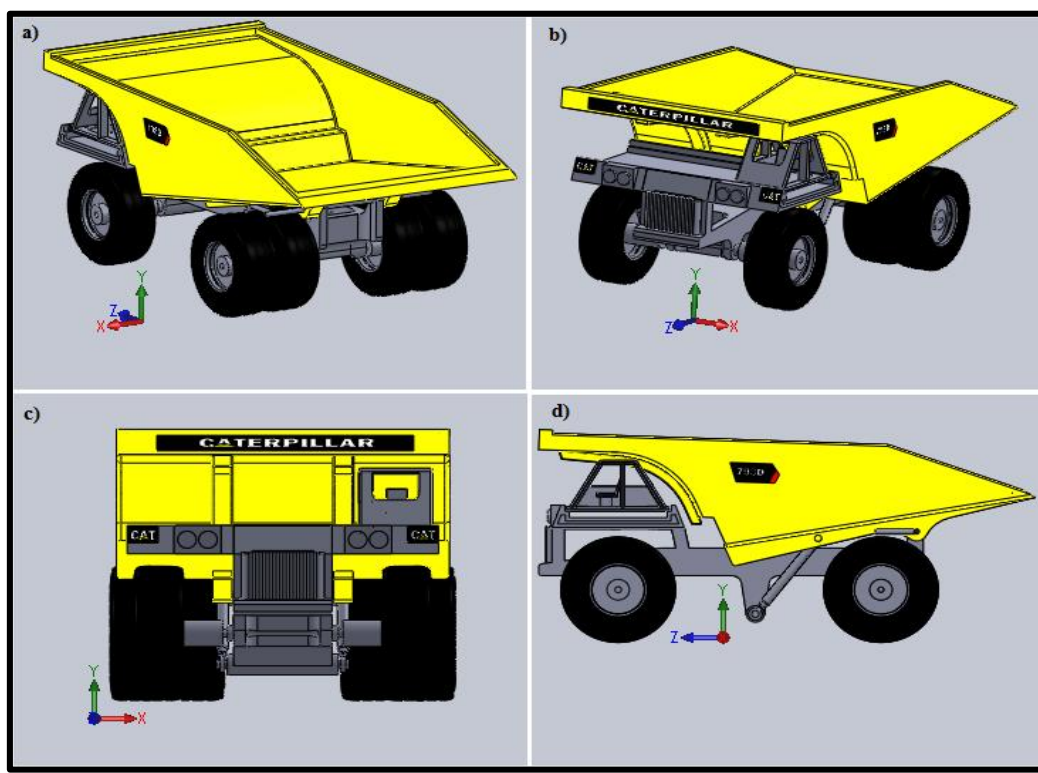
CAT793D Model: a) Back Isometric, b) Front Isometric, c) Front, d) Side Views
